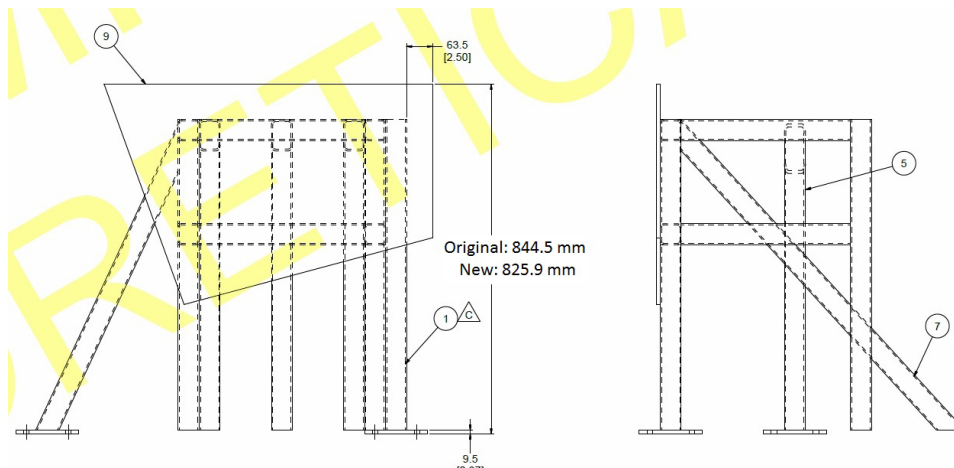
From drawing 2921-240 “Impactor Frame Assembly” depicting the adjusted height of the Impactor Door Plate
